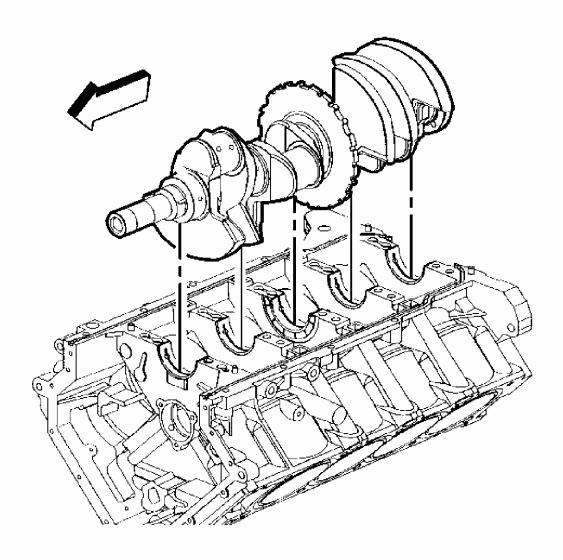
View Of Crankshaft & Engine Block Courtesy of GENERAL MOTORS CORP.
